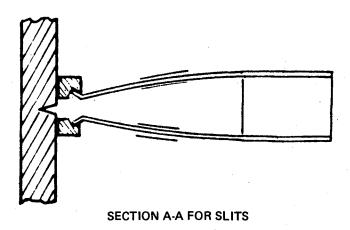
Clip Gage Installation on Test Specimens Containing Defects
